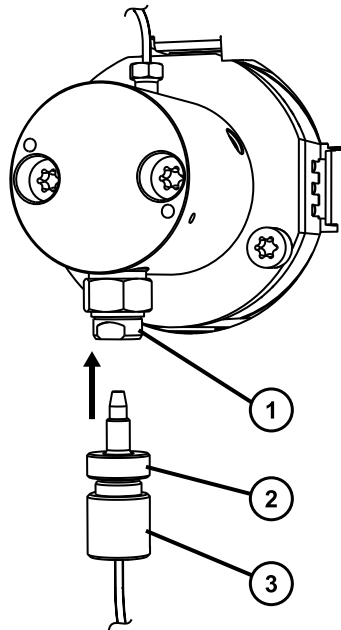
Tightening fitting that secures outlet tubing to transducer
